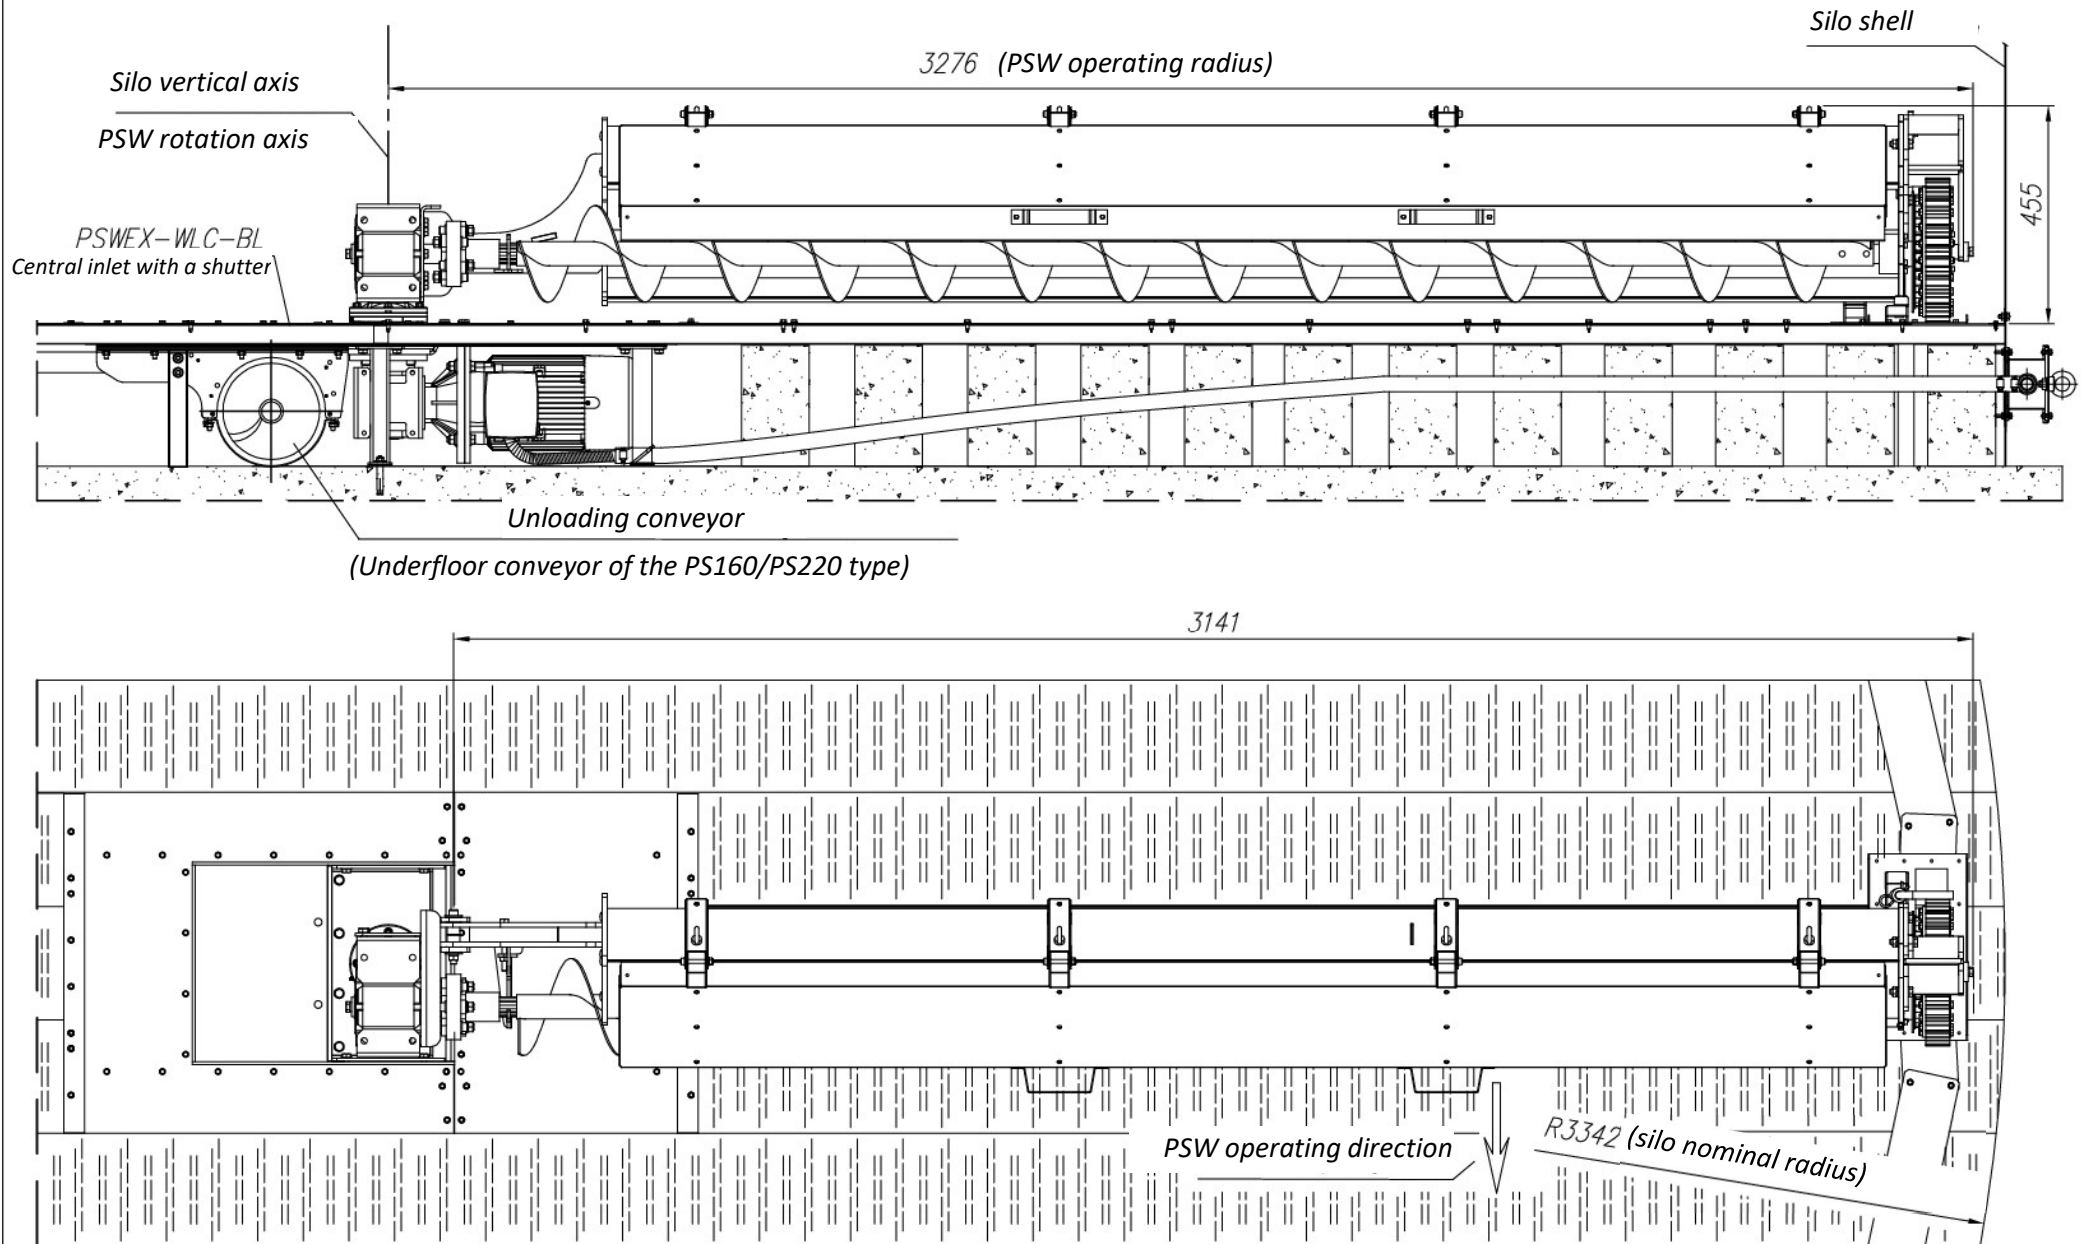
Basic installation dimensions of the internal screw conveyor, of the PSWEX-7 type (dimensions as mm).
